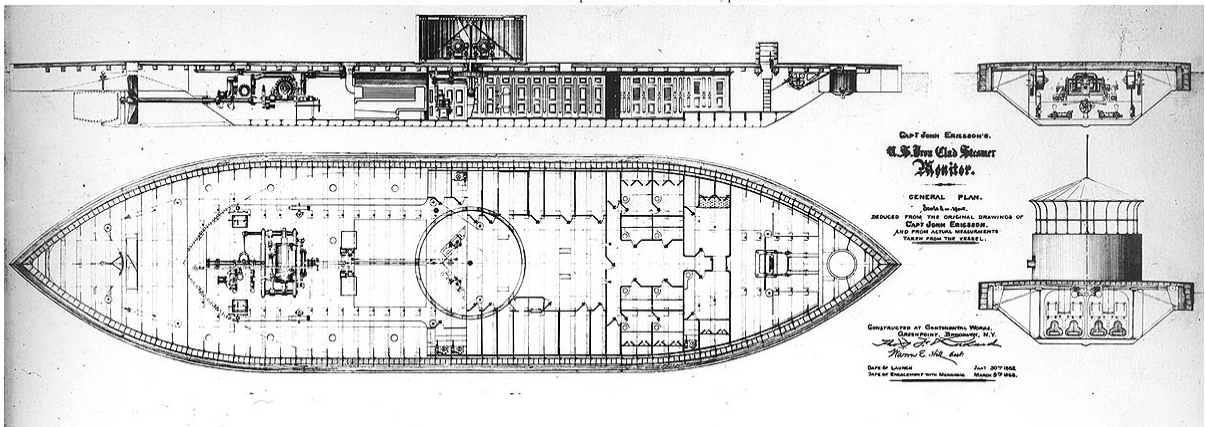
Sketch outboard profile plan of USS Monitor
